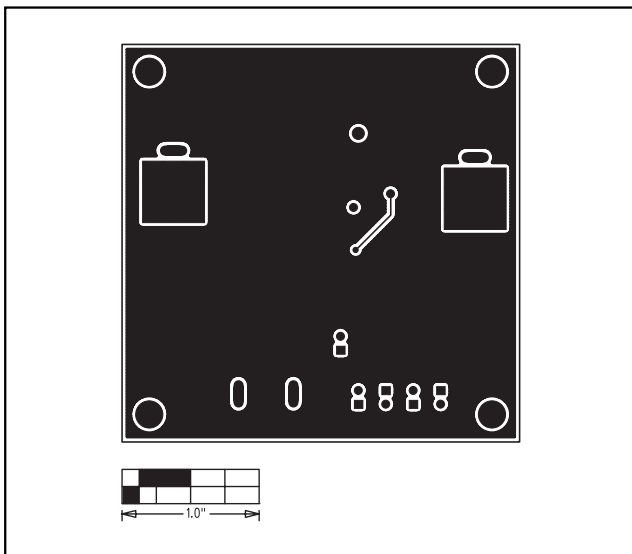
MAX5943A EV Kit PC Board Layout—Solder Side
